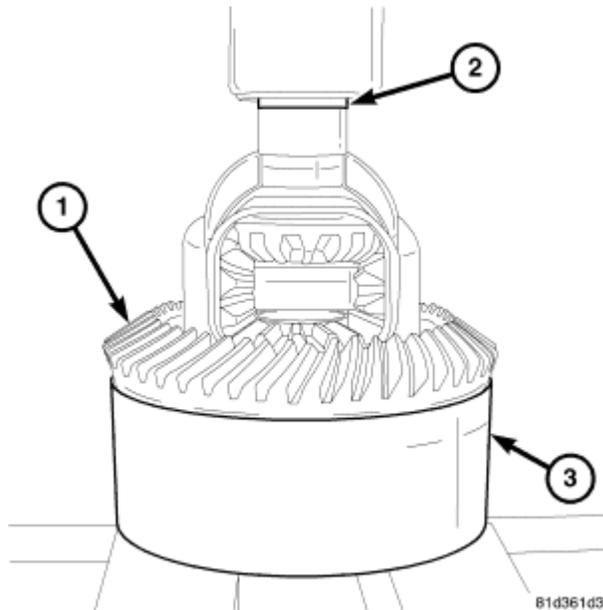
Pressing Ring Gear Off Differential With Plug 8926-2 And Removing 10126-1
